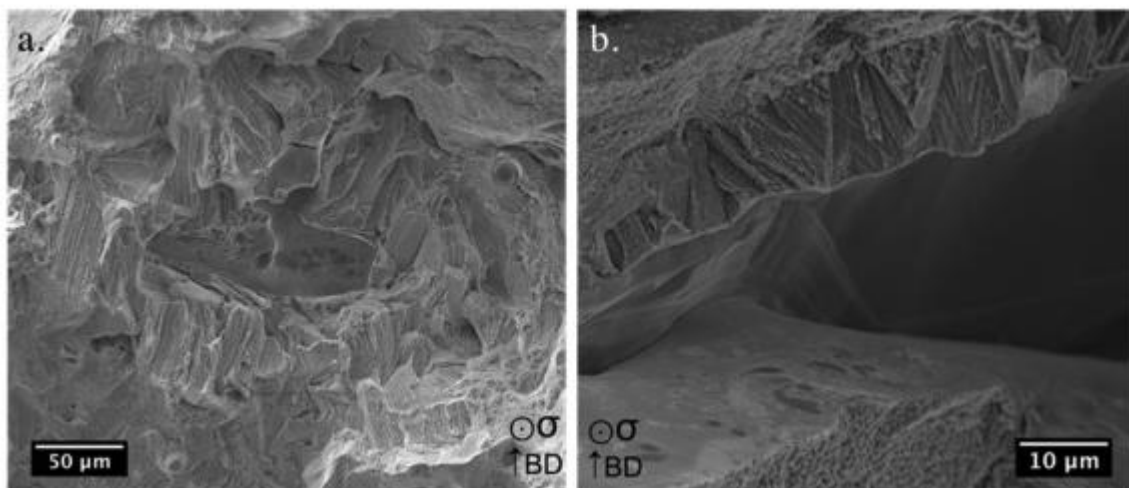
Fracture surface for the tested IN718. The unmelted areas are visible indication lack of fusion defects are responsible for this fracture [87].
